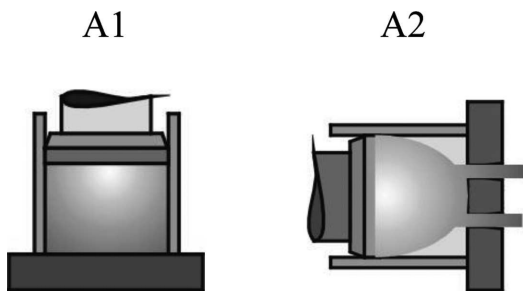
STEP 4: Compacting, consolidation and extrusion of fine chips in the hot extrusion process and Continuous Rotary Extrusion; A1 – cold extrusion – degassing, A2 – Hot Extrusion
